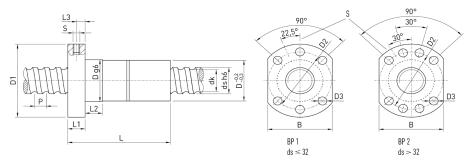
Flange double nut DDB-x with wiper variants K and V
